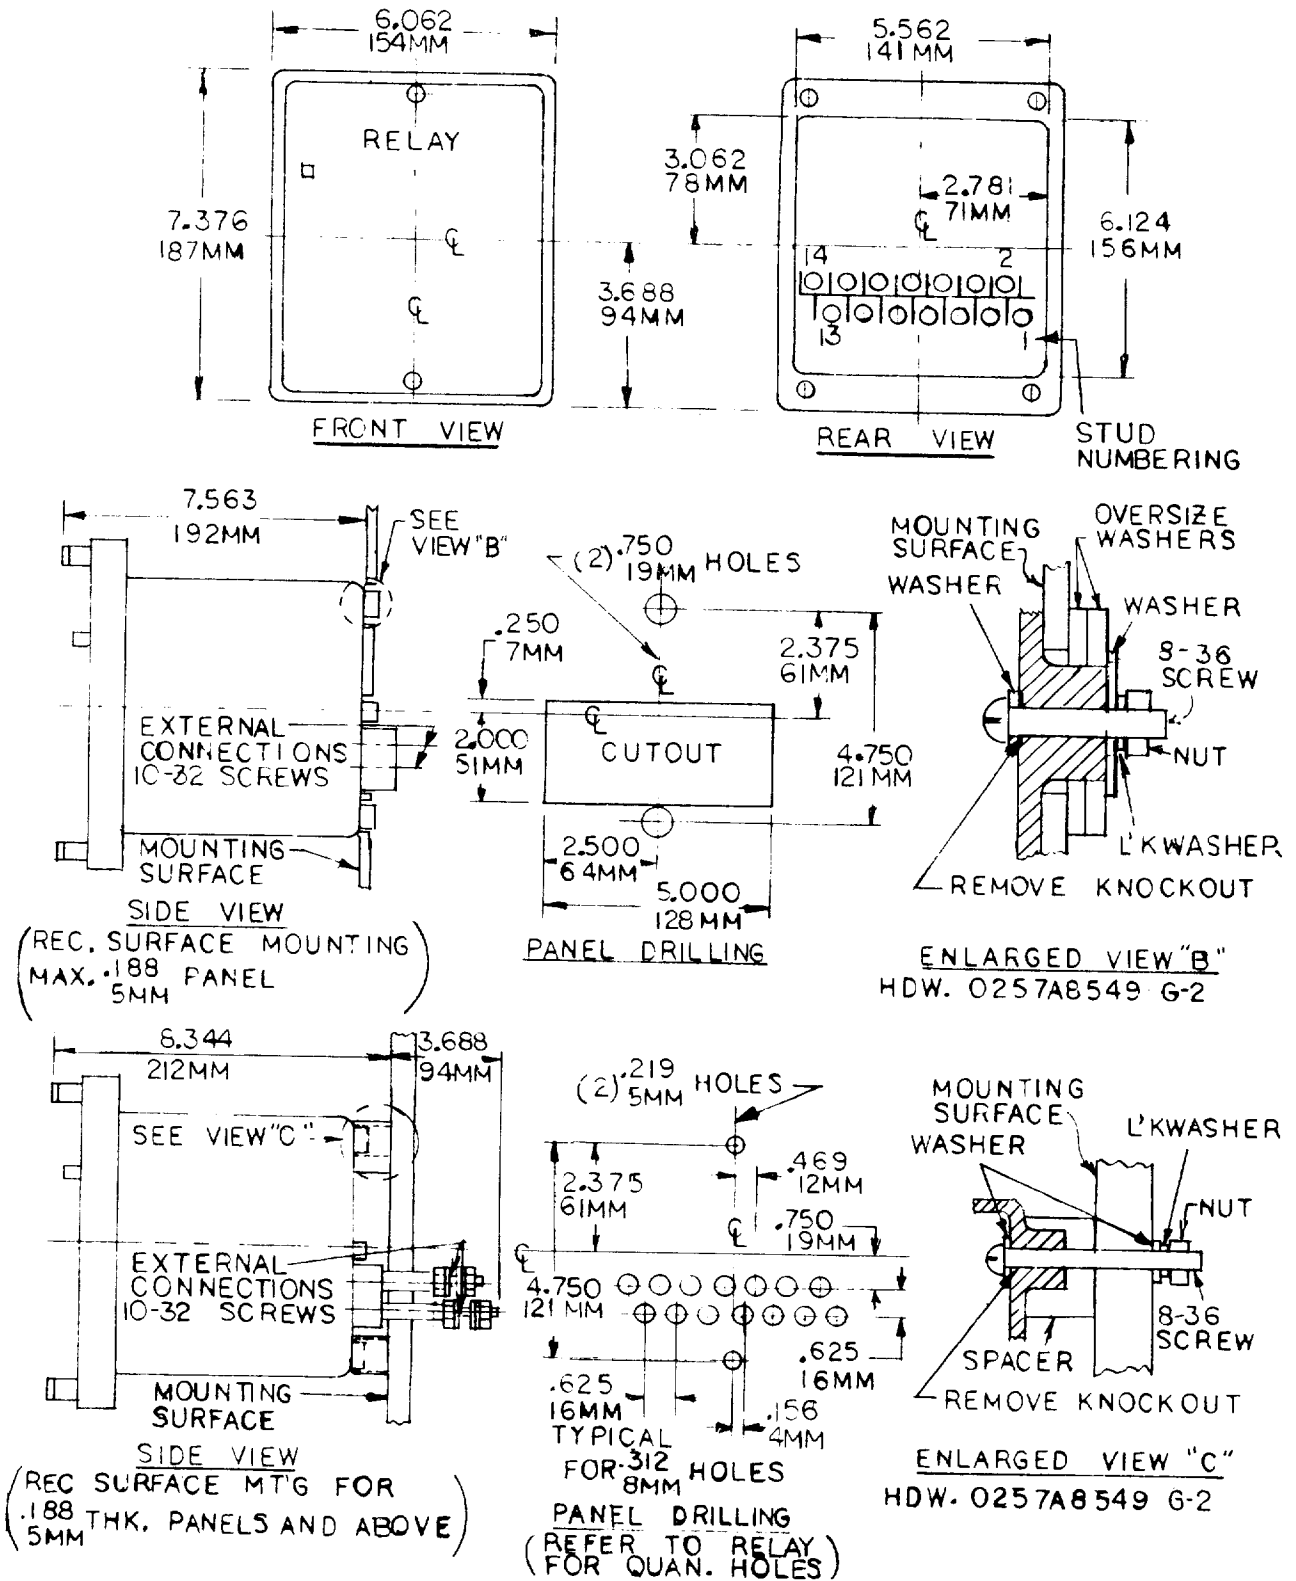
(0257A8452-3 Sheet 2) Outline and Panel Drilling for Surface Mounting of IFC95A Relay
